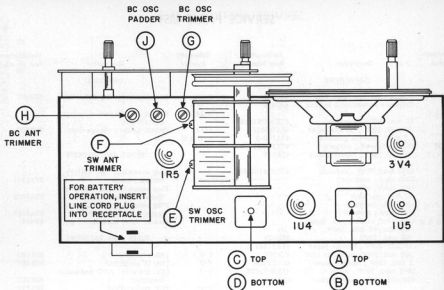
Top View of Chassis Showing Location of Alignment Adjustments
